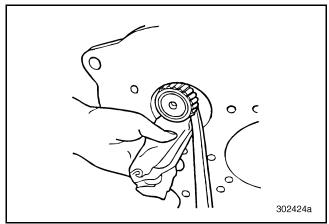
Moving and Blocking No. 1 (Upper Left) Countershaft Away from Mainshaft
